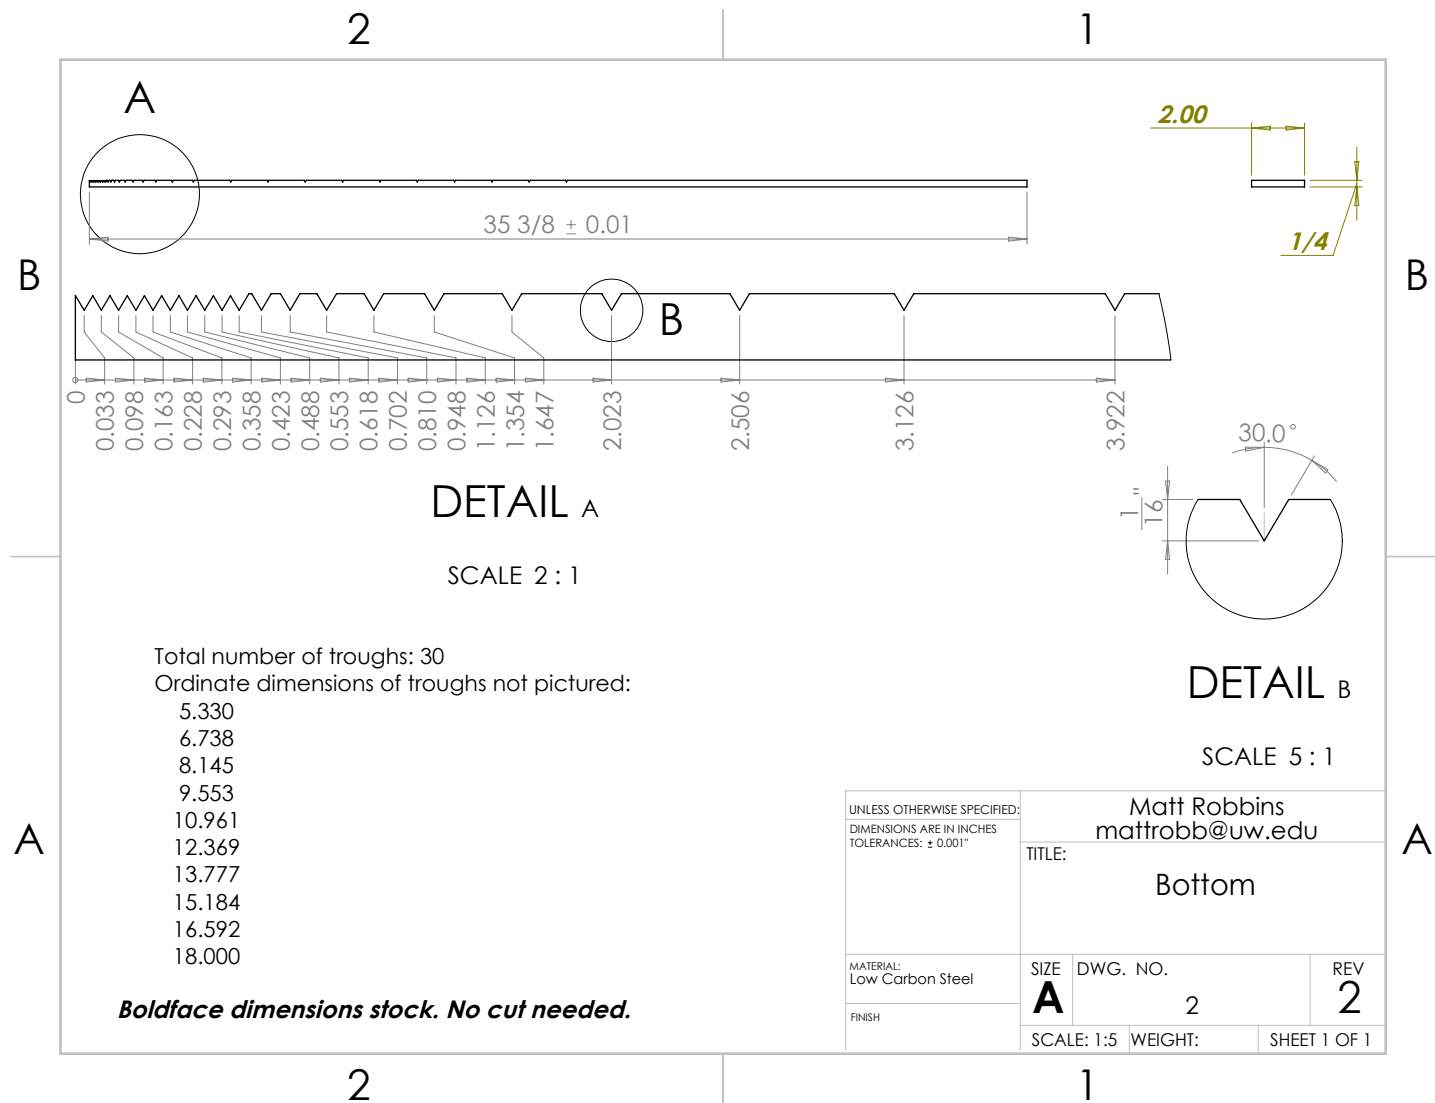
Side view of bottom bar of pitot rake, including trough dimensions.
